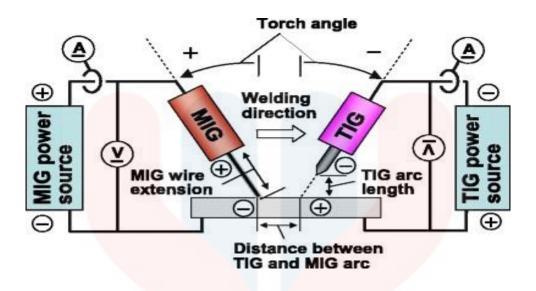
TIG-MIG hybrid welding process (Kanemaru et al., 2013)
